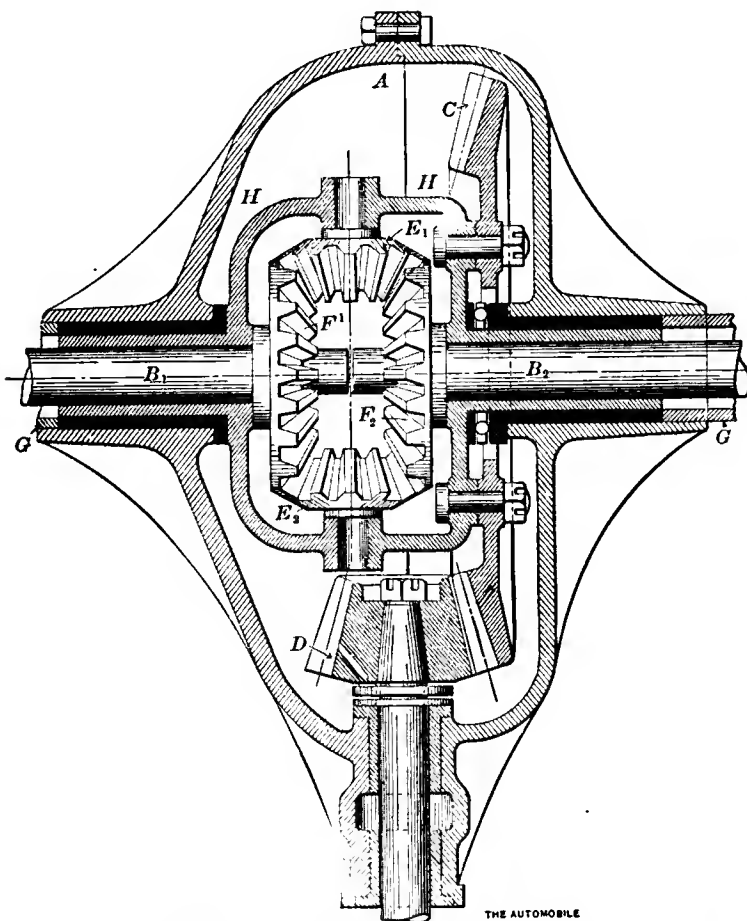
PLAN VIEW PARTLY IN SECTION OF BEVEL GEAR DIFFERENTIAL.
